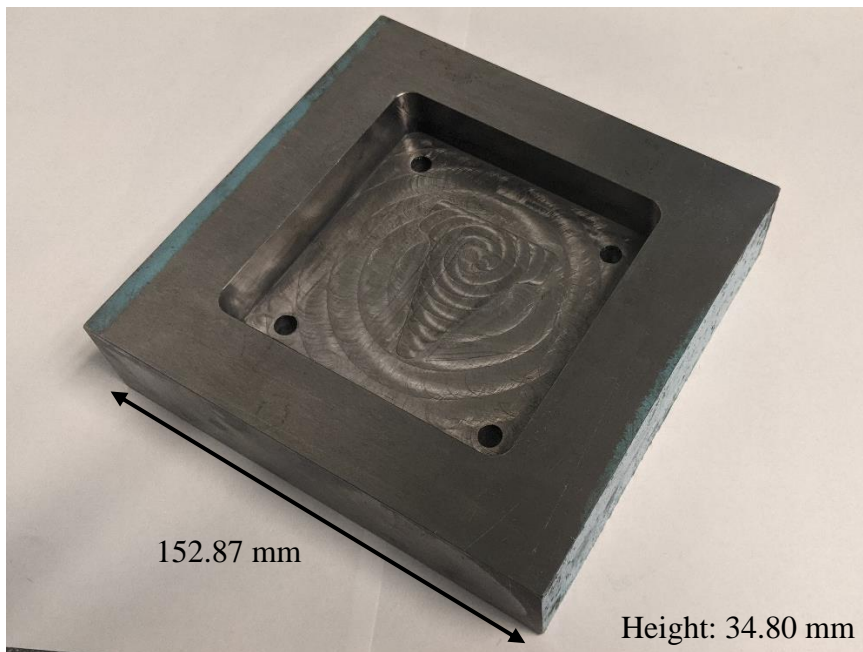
Machined half-feed combine harvester small bottom blade forging die block
